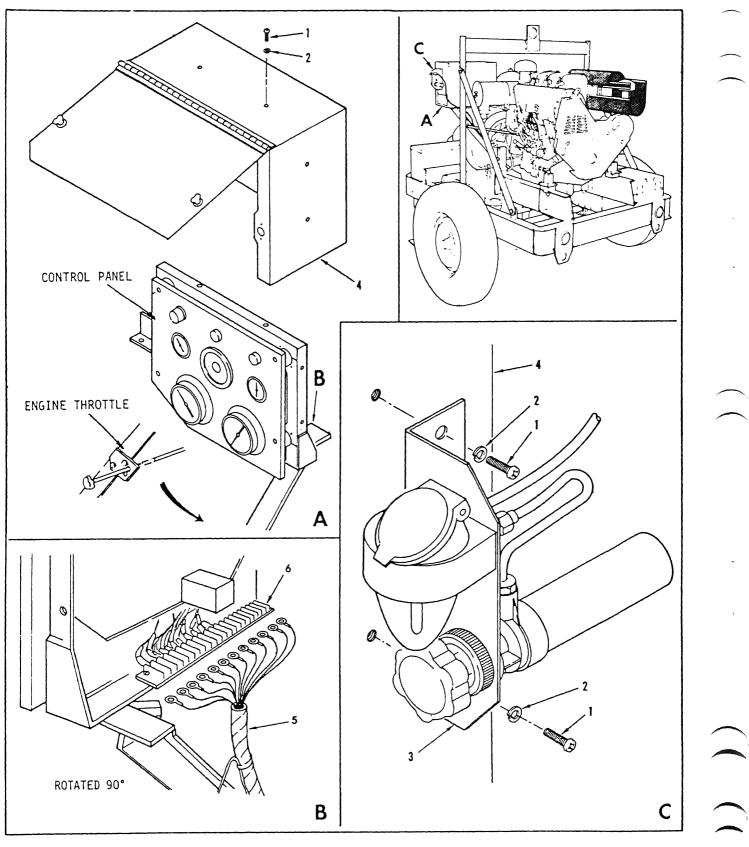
Engine Assembly, Removal Installation (Sheet 1 of 2)
